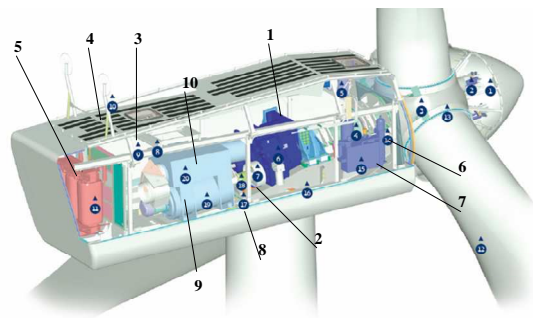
Wind power plant VESTAS V90/2.0 MW [14] (1-gearbox, 2-mechanical disc brake, 3-controller with converter, 4-sensors, 5-high voltage transformer, 6-rotor lock system, 7-hydraulic unit, 8-yaw gears, 9-asynchronous generator, 10-air cooler generator.)
